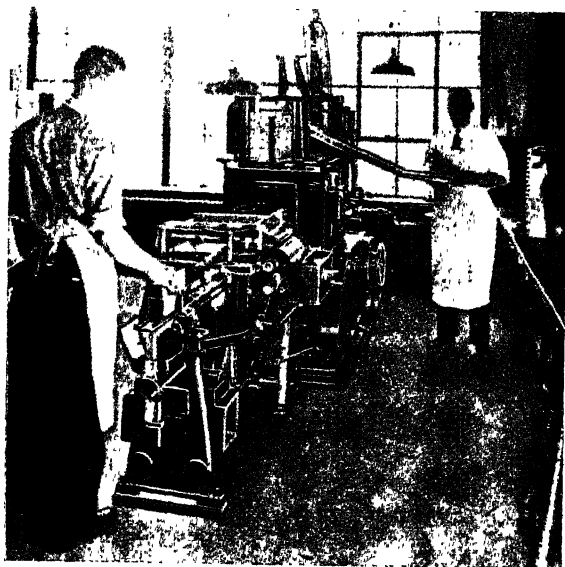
"SMYTH" BOOK-BACK GLUING MACHINE
